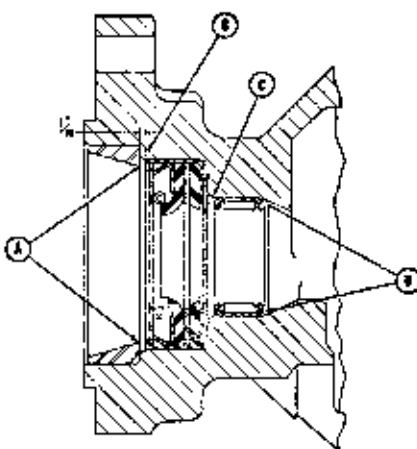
Later production of the piston type pump incorporates a tapered roller bearing and a needle roller bearing. Bearing and seal placement is as shown. Refer to text for recommendation on seal installation.
